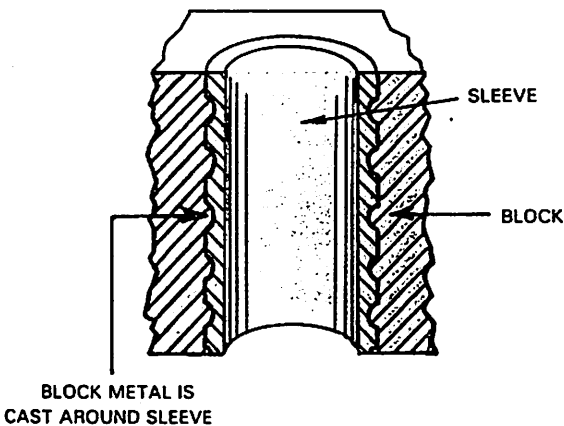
Sleeve held by casting in block. Grooved sleeves prevent movement.
